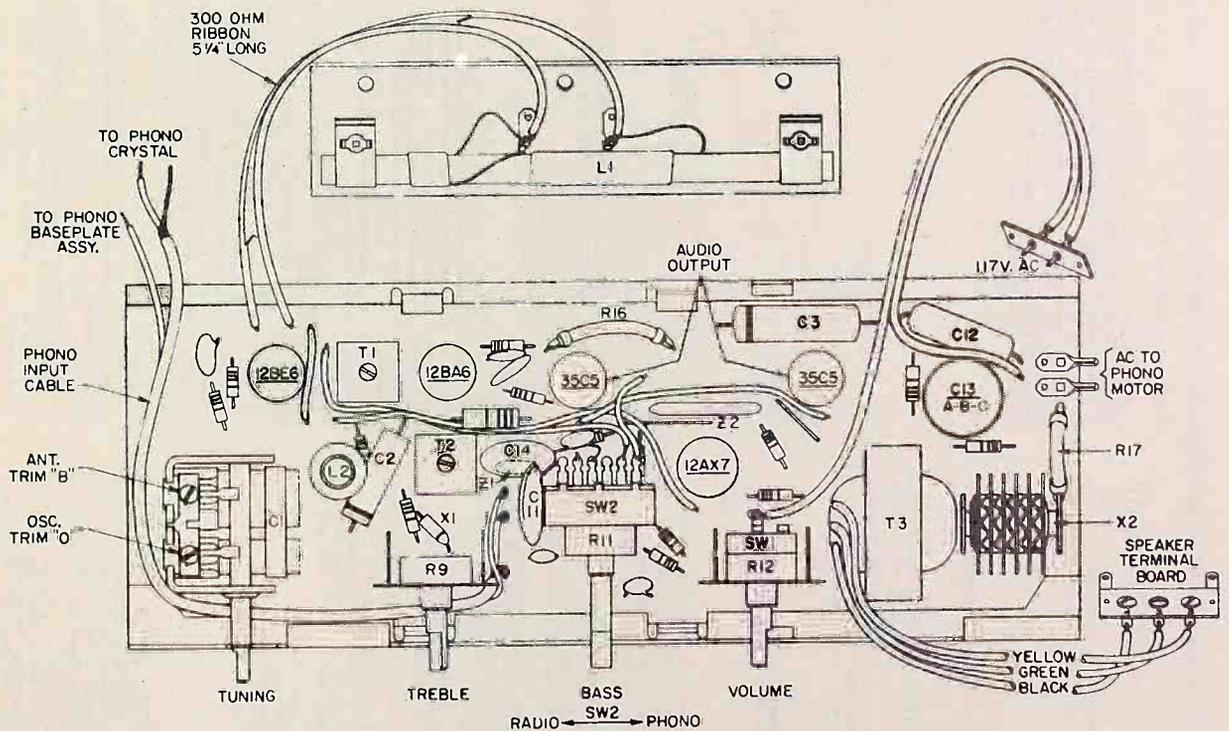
TOP VIEW OF V-2503-1 CHASSIS
